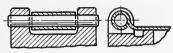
Sheet-metal cover bent around the hinge pin.
